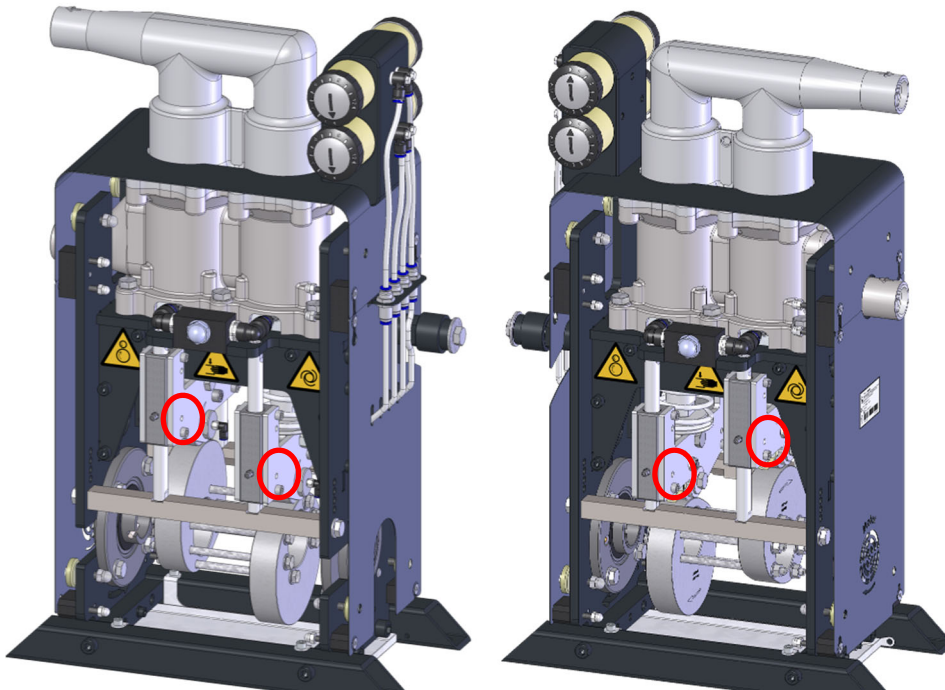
Position of the four lubricating nipples of the plain bearings
